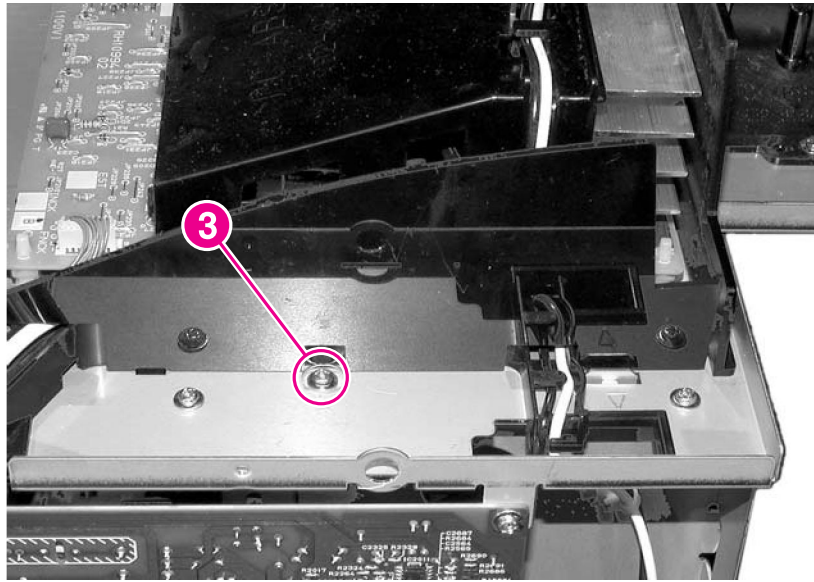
Remove the right side laser/scanner retaining bar (1 of 2, right side of printer)
